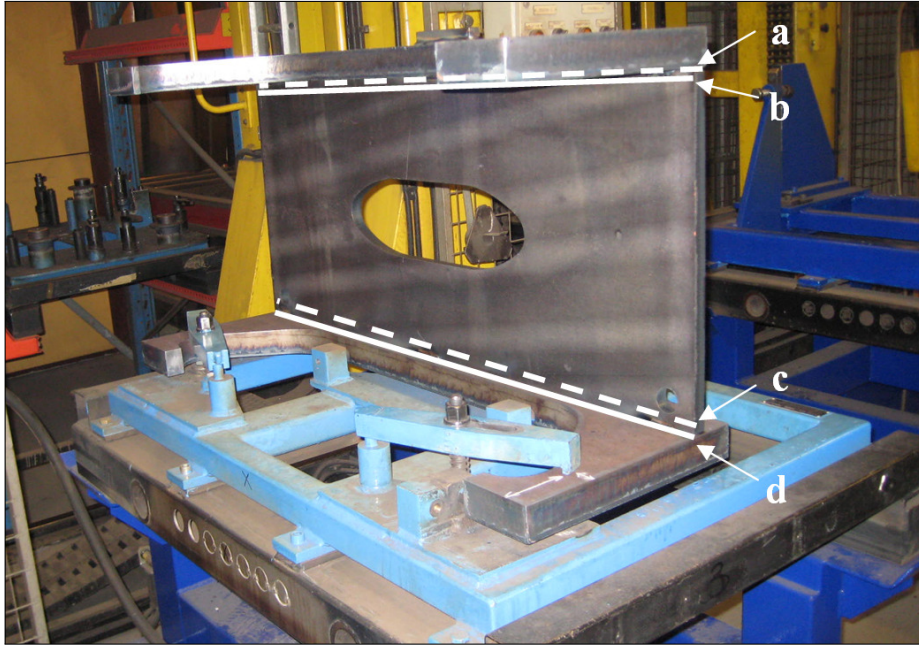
Real axle bridge placed in its welding fixture. The weld joints (a–d) are marked with white lines; welds a and c are placed underneath the center plate.
